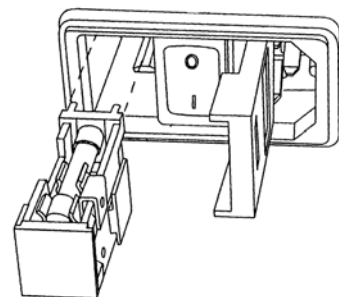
Fuse holder removed and fuse coverlid open. (115V; 6.3x32 mm fuse)
